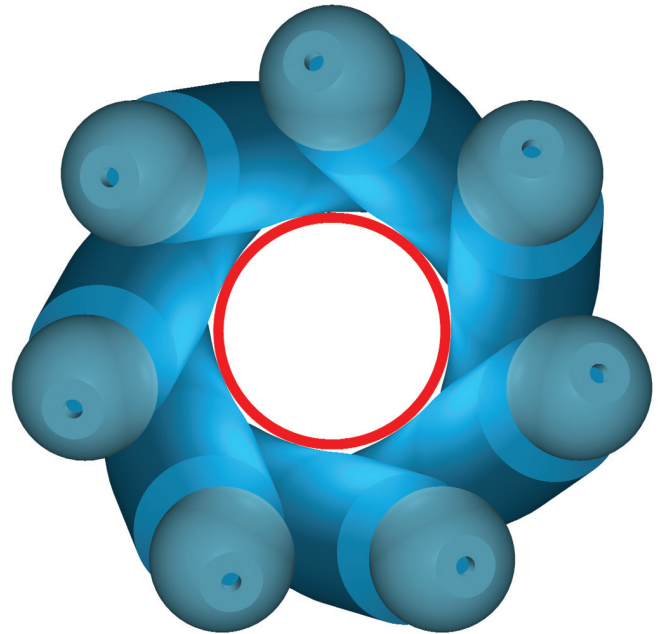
End view of rollers encircling the tube and set at an angle to the axis of the tube
